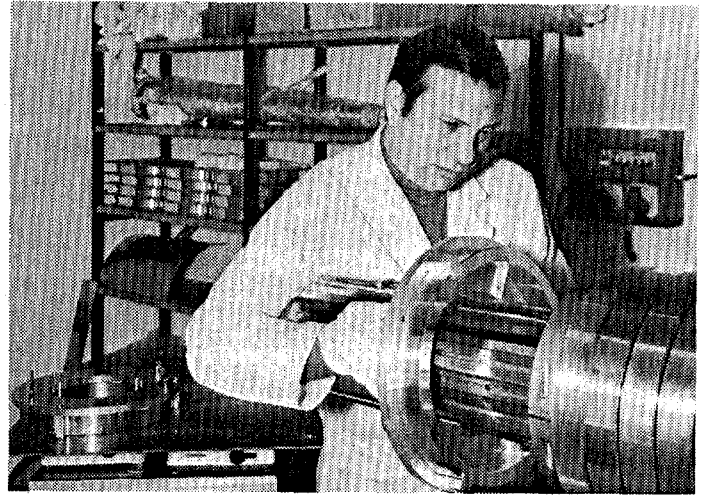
Mounting of the 160°C heated outer clamping rings of Al alloy
